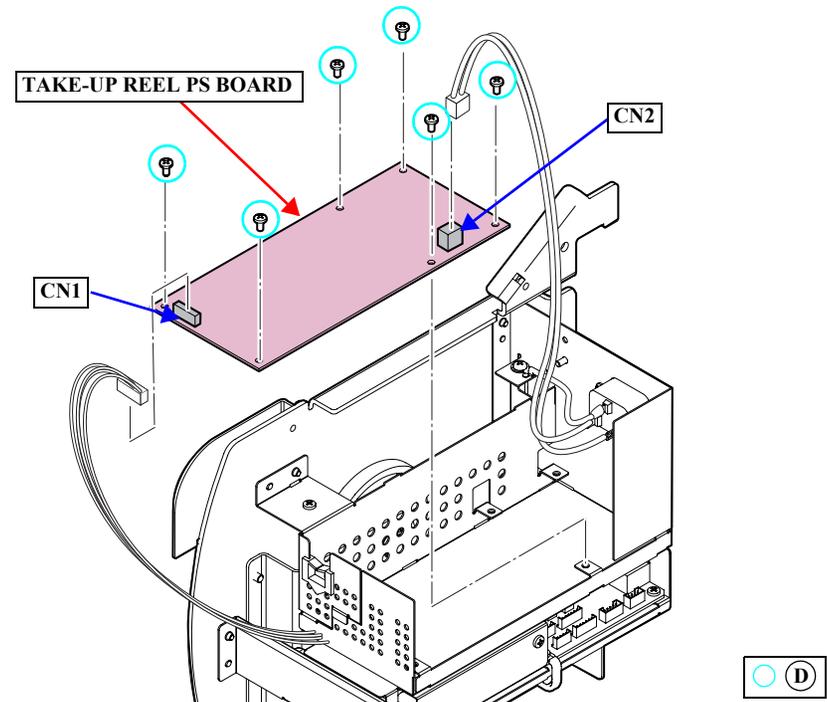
Removing the TAKE-UP REEL PS BOARD
